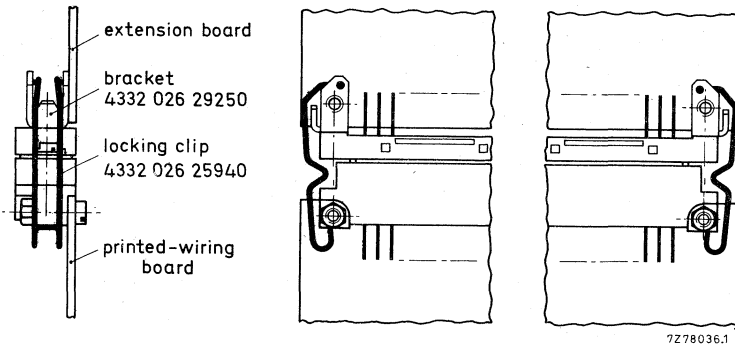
Mounting of a female part to an extension board with bracket having locking facility.
